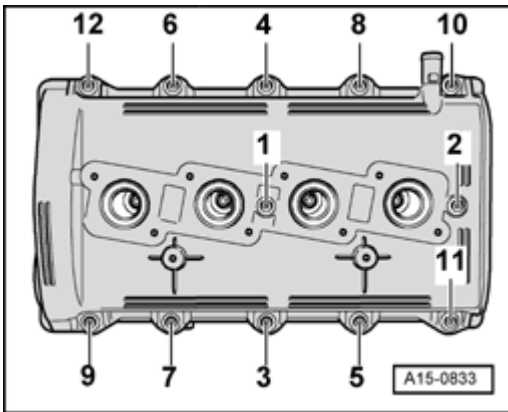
Cylinder Head Cove Bolt Loosening/Tightening Sequence
